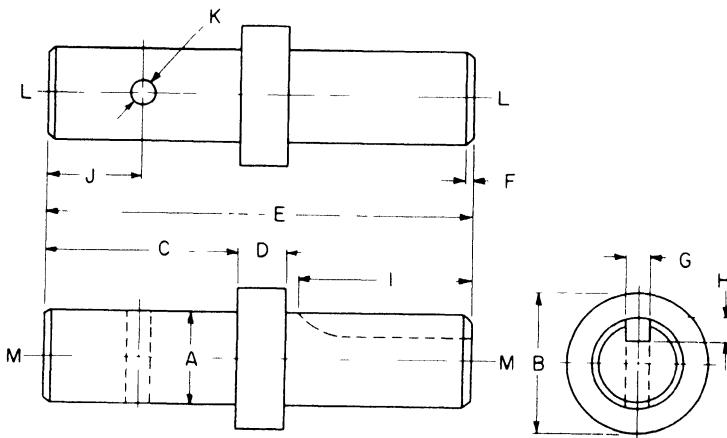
Dimensions *A*, *B*, *C*, *D*, *E*, and *F* are measured after lathe operation; Dimensions *G*, *H*, and *I* after milling; diameter *K*, dimension *J* after drilling.
